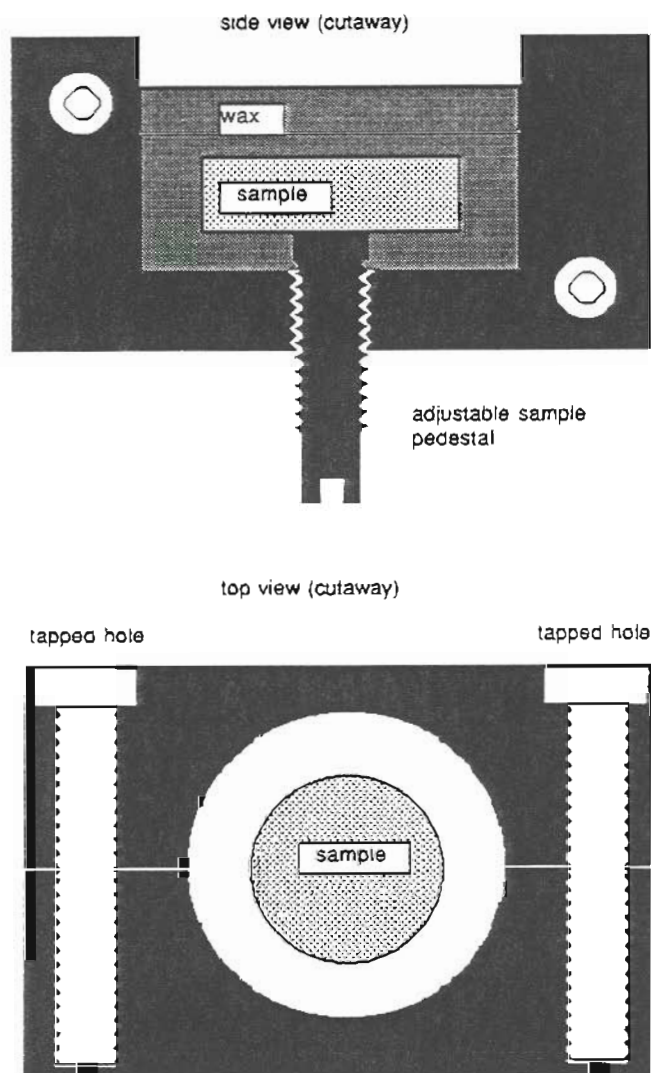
A sample is placed on the pedestal within the mold and heated wax poured around the specimen. The mold is then removed and the encased sample transferred to a low-speed diamond saw for cutting.
